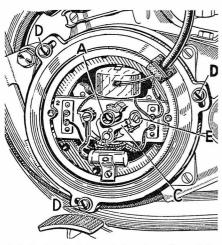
Ignition timing is adjusted by moving the stator plate after loosening three screws (D).
